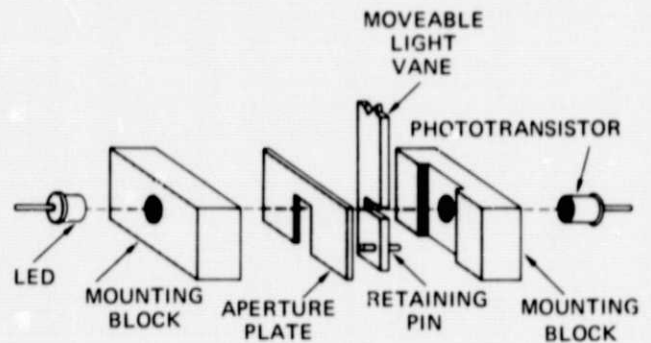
EXPLODED DRAWING OF SHUTTER
